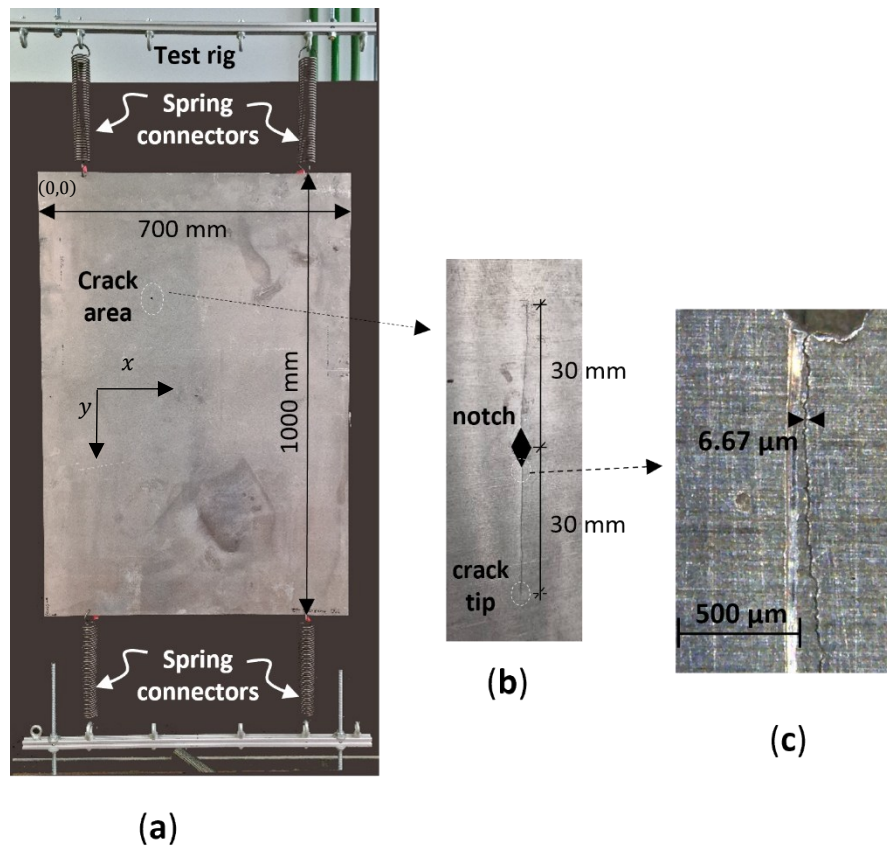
(a) Plate specimen installed in test rig; (b, c) Close-up view of notch and crack (crack length $a=30$ mm)
